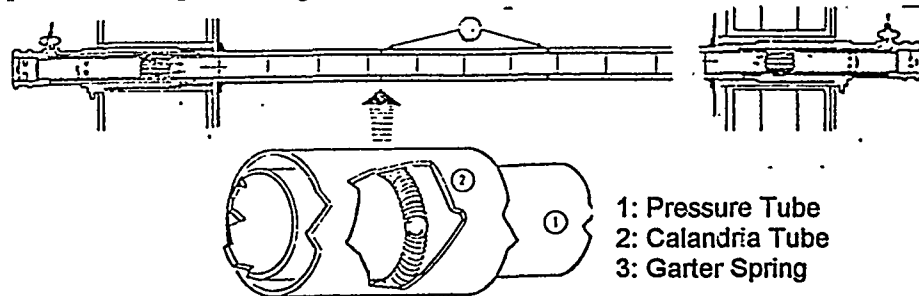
Pressure Tube - Calandria Tube Assembly
